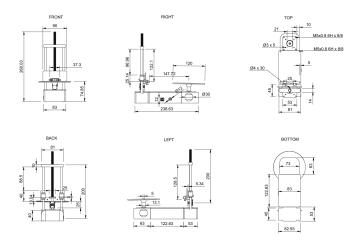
Orthographic views of the 3D scanner model showing dimensions
